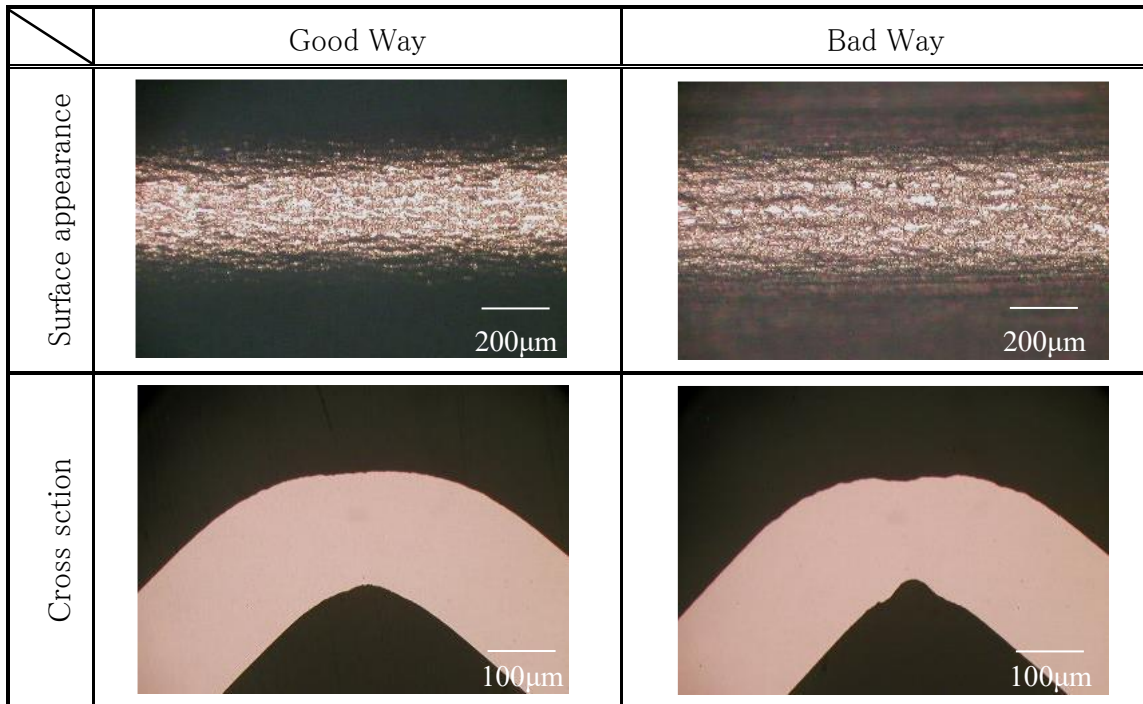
Surface appearances and cross sections of W-shaped bending test specimens.
